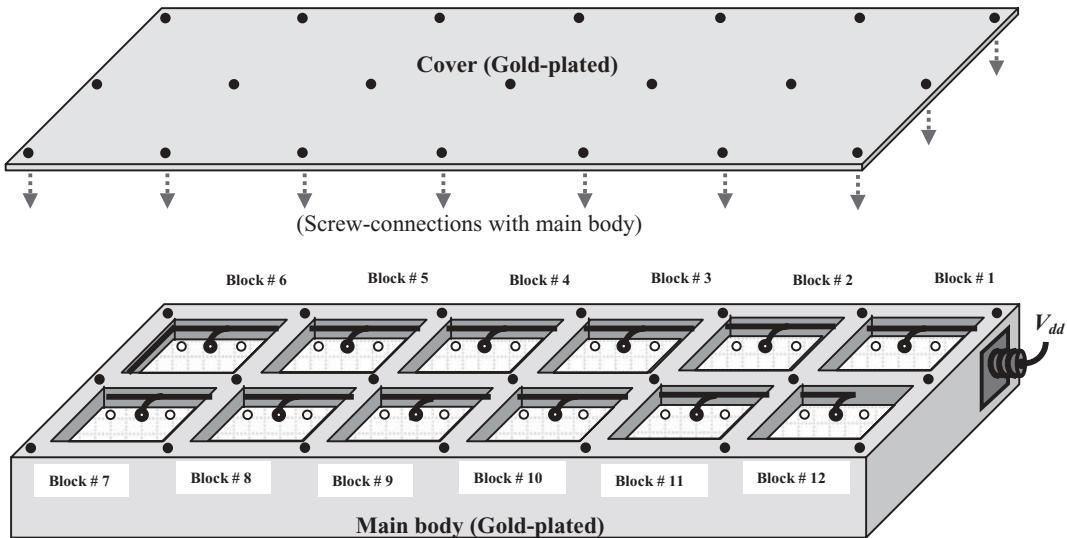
Configuration of a “multi-closet” type system assembly.
